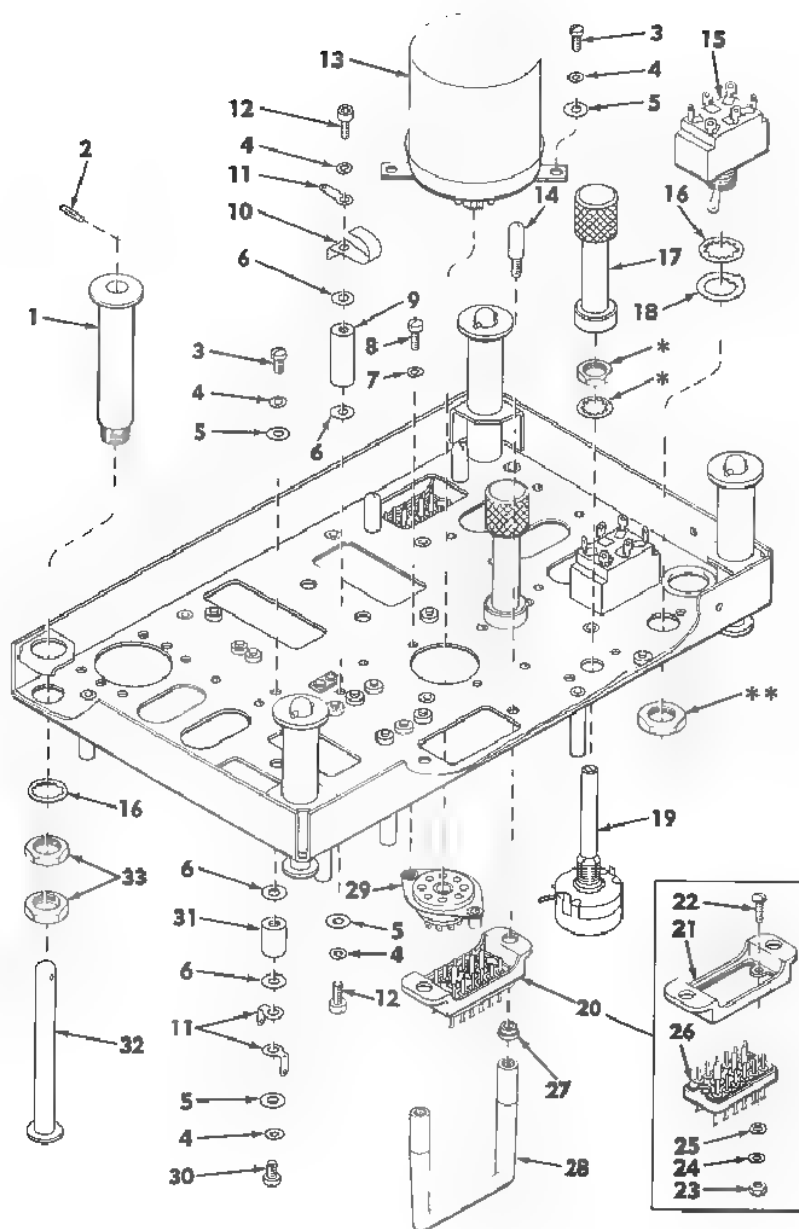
SWITCH AND RESISTOR /8011650/-EXPLODED VIEW
